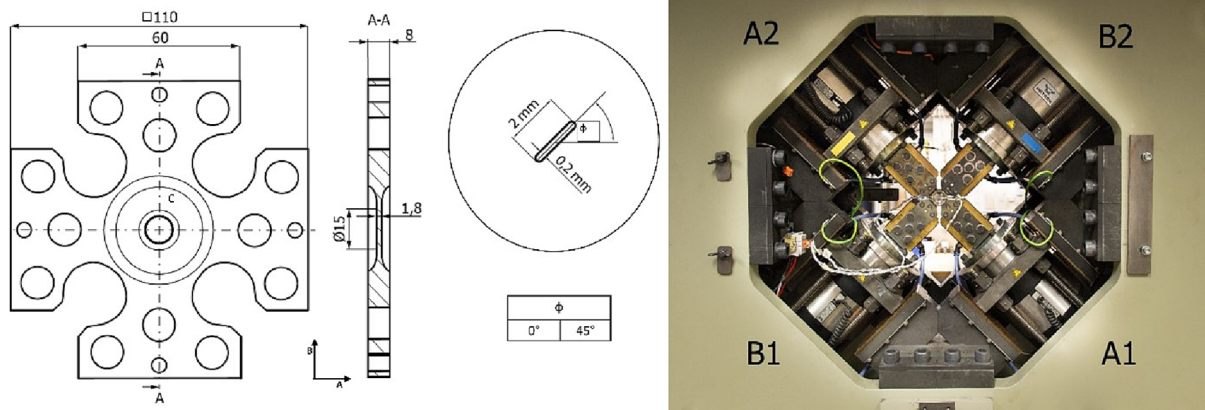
Cruciform specimen for biaxial loading (left). Detail C outlines the orientation of the crack-starter notch. Right: Biaxial testing machine. The digital image correlation (DIC) sensor head shown in Figure 2 is mounted on the back side of the frame.
